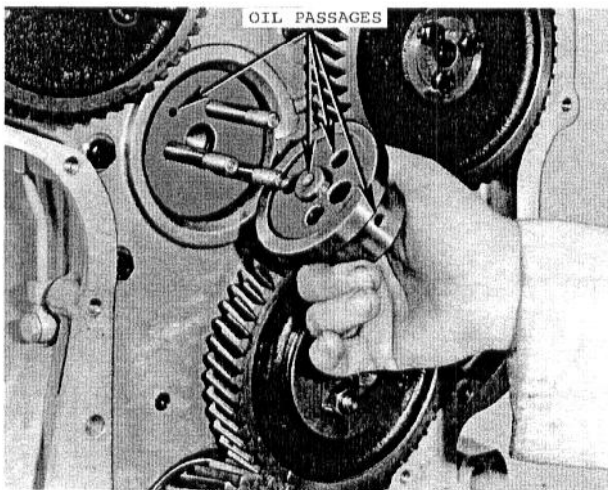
Removing or Installing Upper Idler Gear Hub
